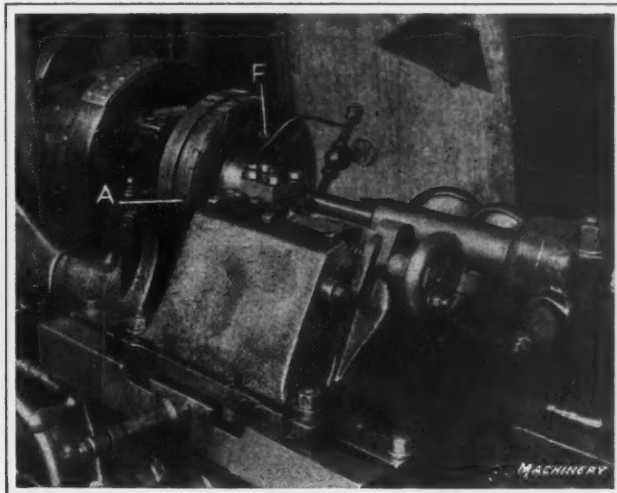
Lathe employed in turning Calks on Outer Angular Surface of Forgings with Special Attachment
